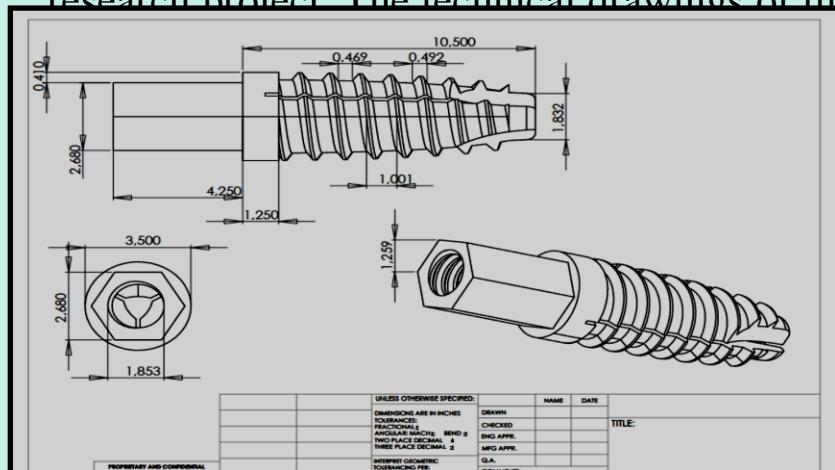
Technical drawing of the model developed in final specification for CNC milling.
